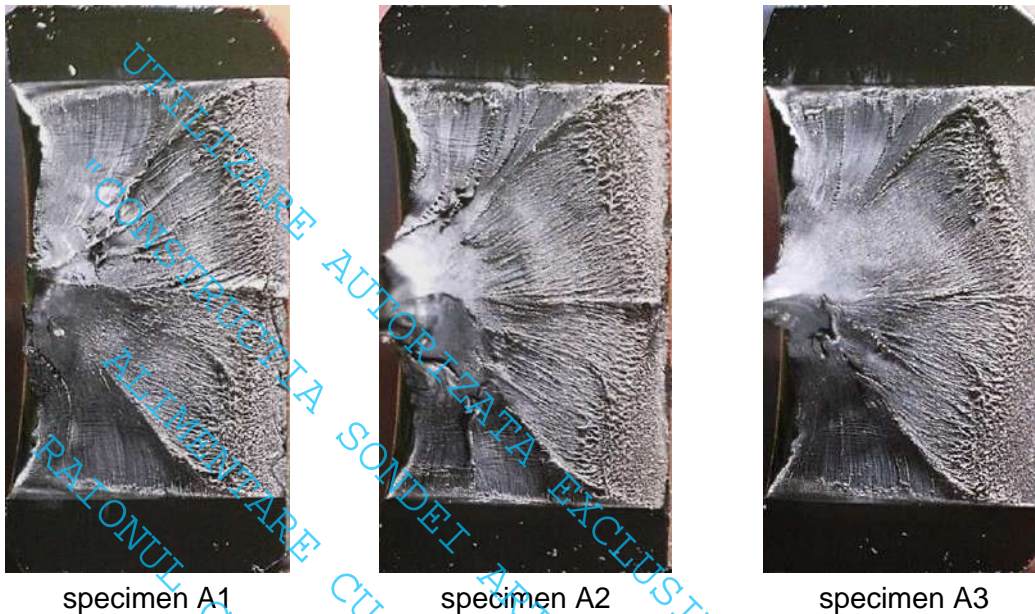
Top view of the fracture surfaces (one half of each specimen)
